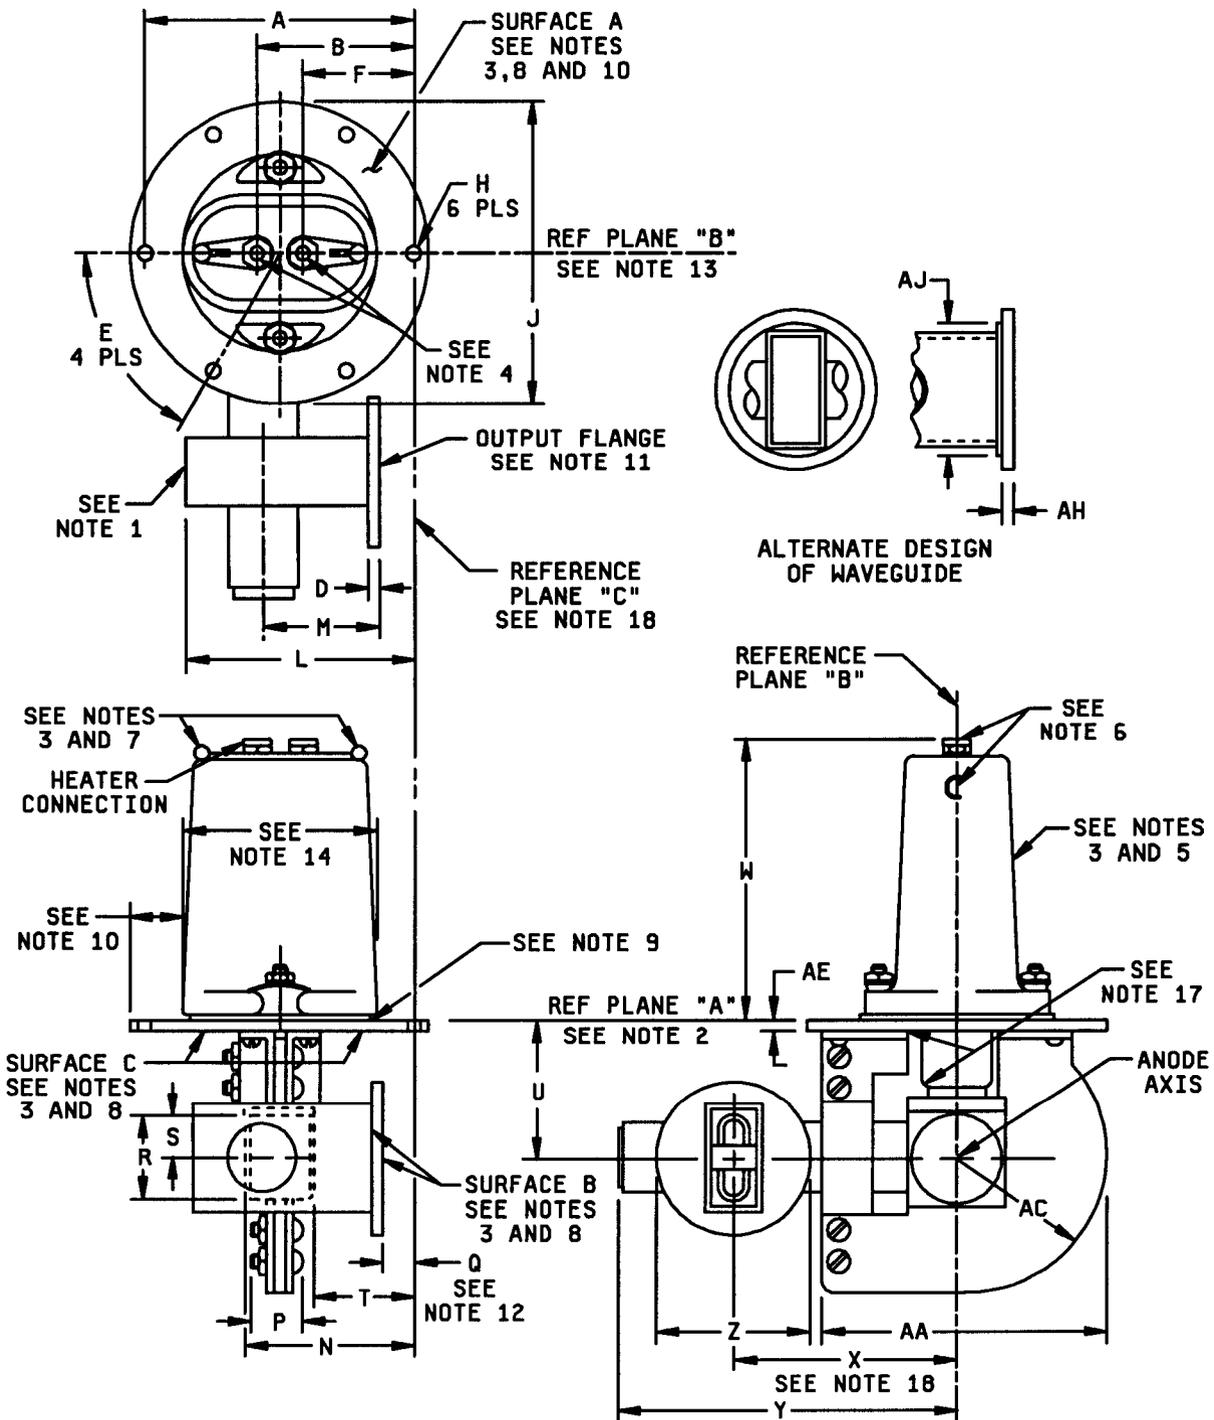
Outline drawing of electron tube types 2J49 and 2J50.
